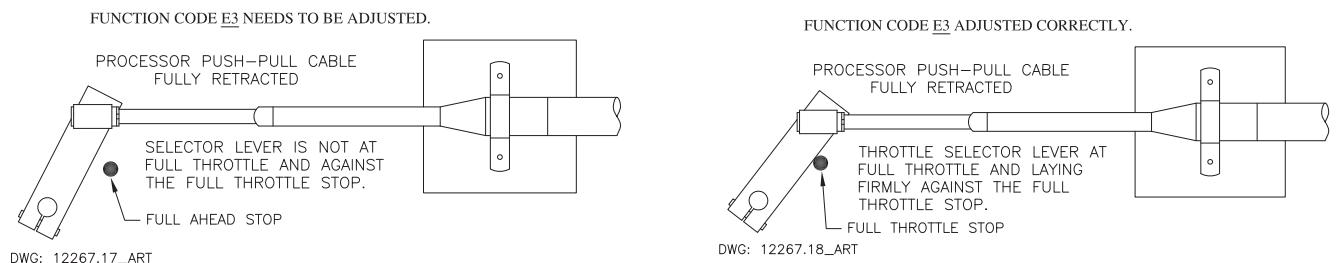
Throttle Push-Pull Cable Full Throttle Position
